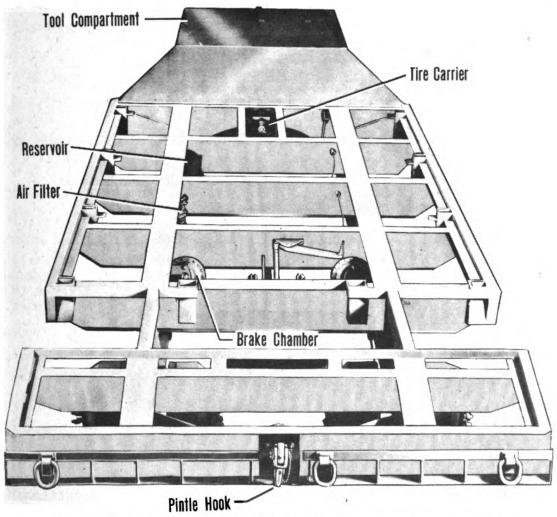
Looking Down on Full Bed of Trailer, with Platform Removed.
